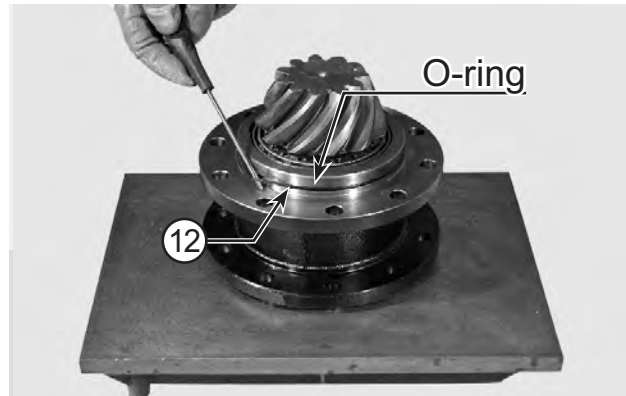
Install a new seal-ring (12). Lubricate the seal ring before fitting.
